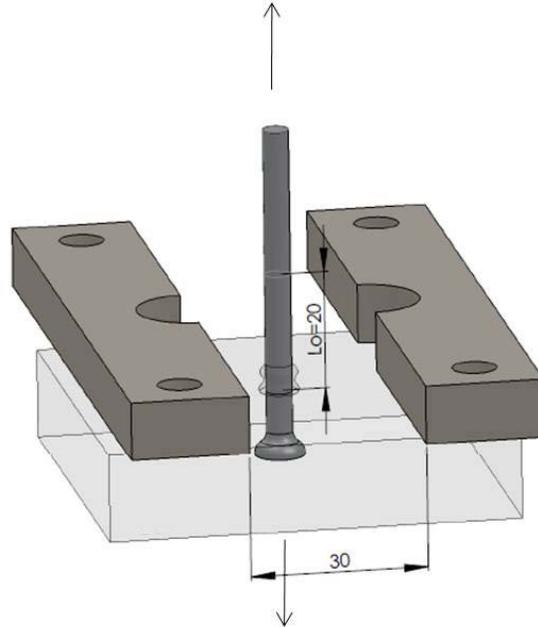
(A) Scheme of T-Pull tensile testing in friction riveted joints.
